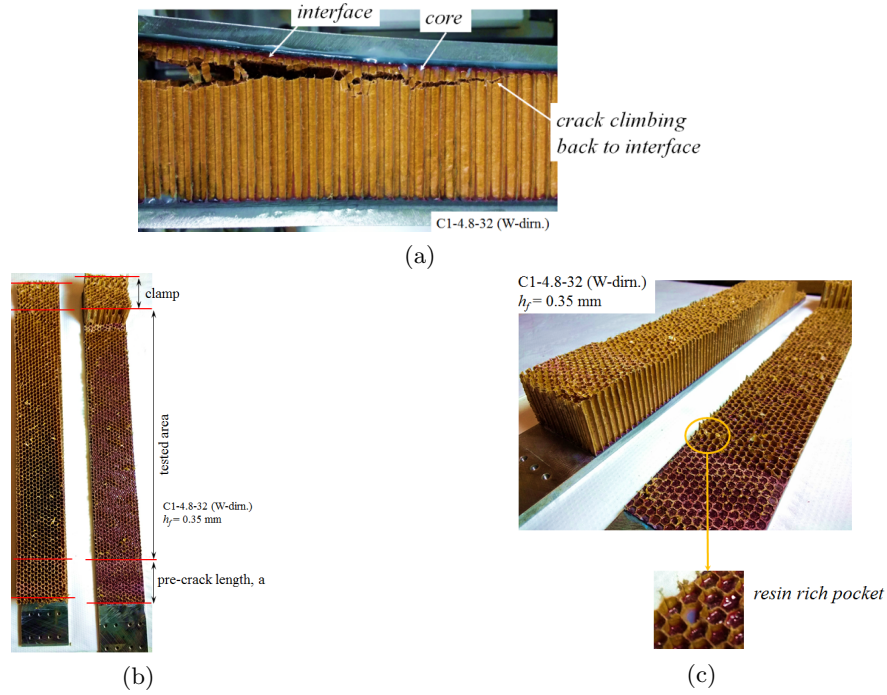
Interface crack propagation and fracture surfaces for CFRP/C1-type honeycomb core specimens with $h_c = 40$ mm; (a) crack climbing back to interface in C1-32 core type specimen (W-direction) with $h_f = 1.4$ mm, and (b) C1-type specimen showing interface crack propagation throughout the tested length of the specimen, and (c) resin rich cell in C1-4.8-32 specimen with $h_f = 0.35$ mm.
